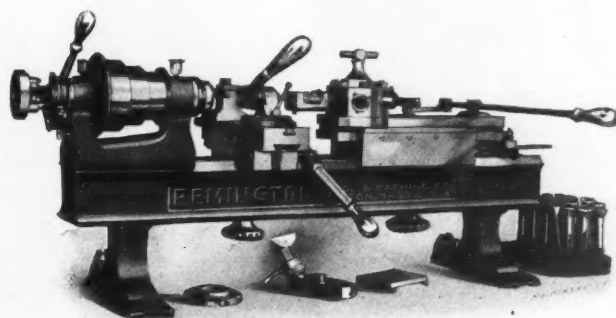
Bench Lathe arranged with Turret and Forming and Cutting-off Slide
